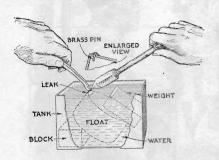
Solder carburetor or vacuum tank floats in this way to make a tight seal
